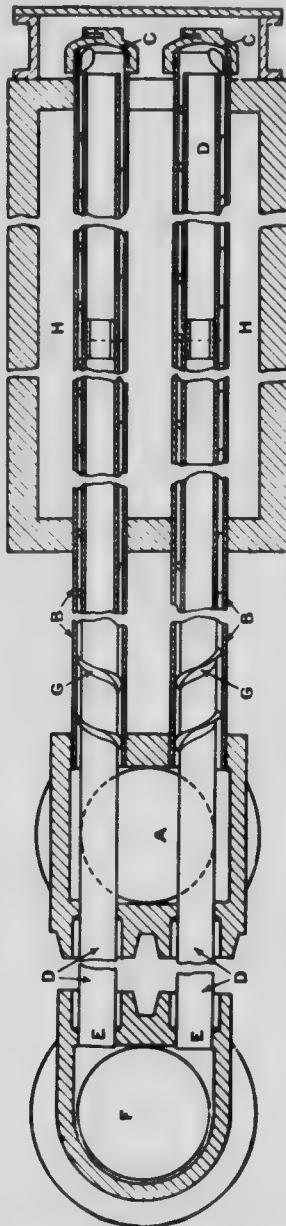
Sectional view of Testrup wet carbonizing apparatus.
